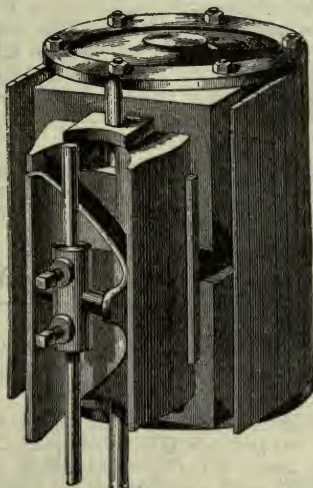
Rider variable cut off gear. In this riding cut off gear, the cut off is altered, as in the Meyer gear by varying the lap. *In construction*, the back of the main valve is hollowed into a part of a cylinder whose axis is the center of the riding valve. The lap edges of the riding valve and steam edges of the main valve are tapered in such a manner that by rotating the riding valve, its lap is changed. This rotation is accomplished by a spindle attached to the governor, gearing into a sector on the valve stem.
